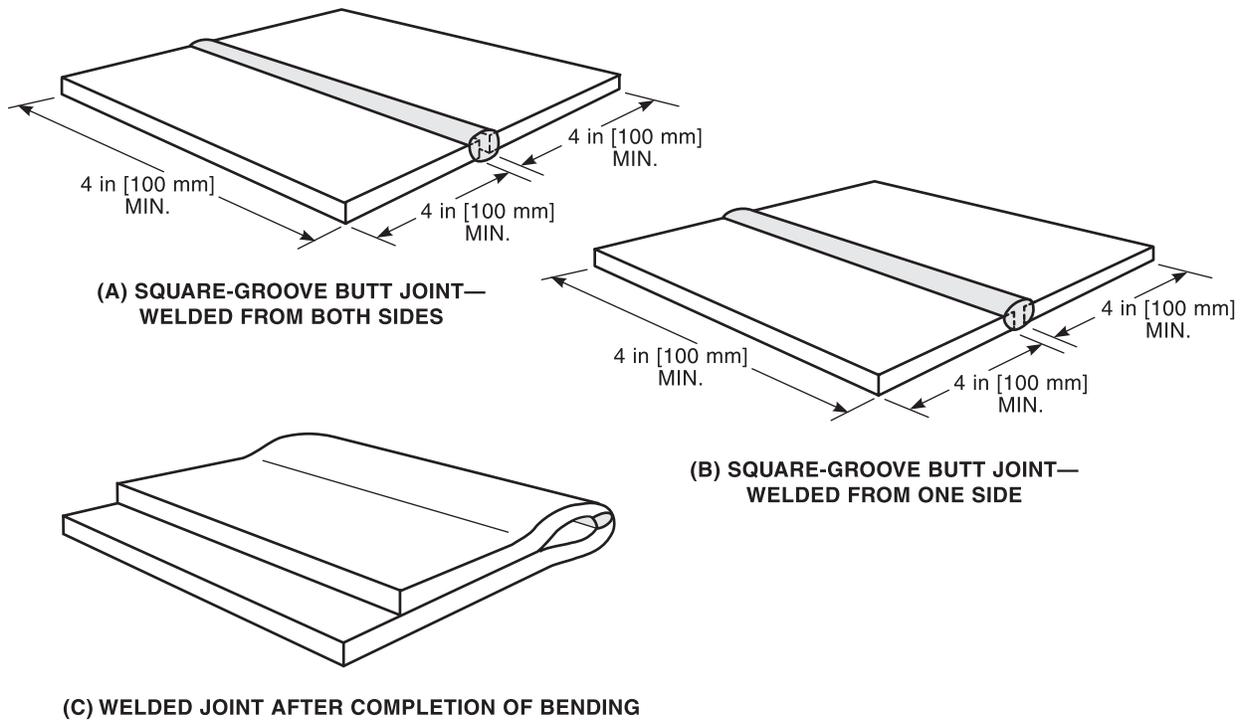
Test for Square-Groove Welds in Butt Joints [see 4.6.1.2(1)]
